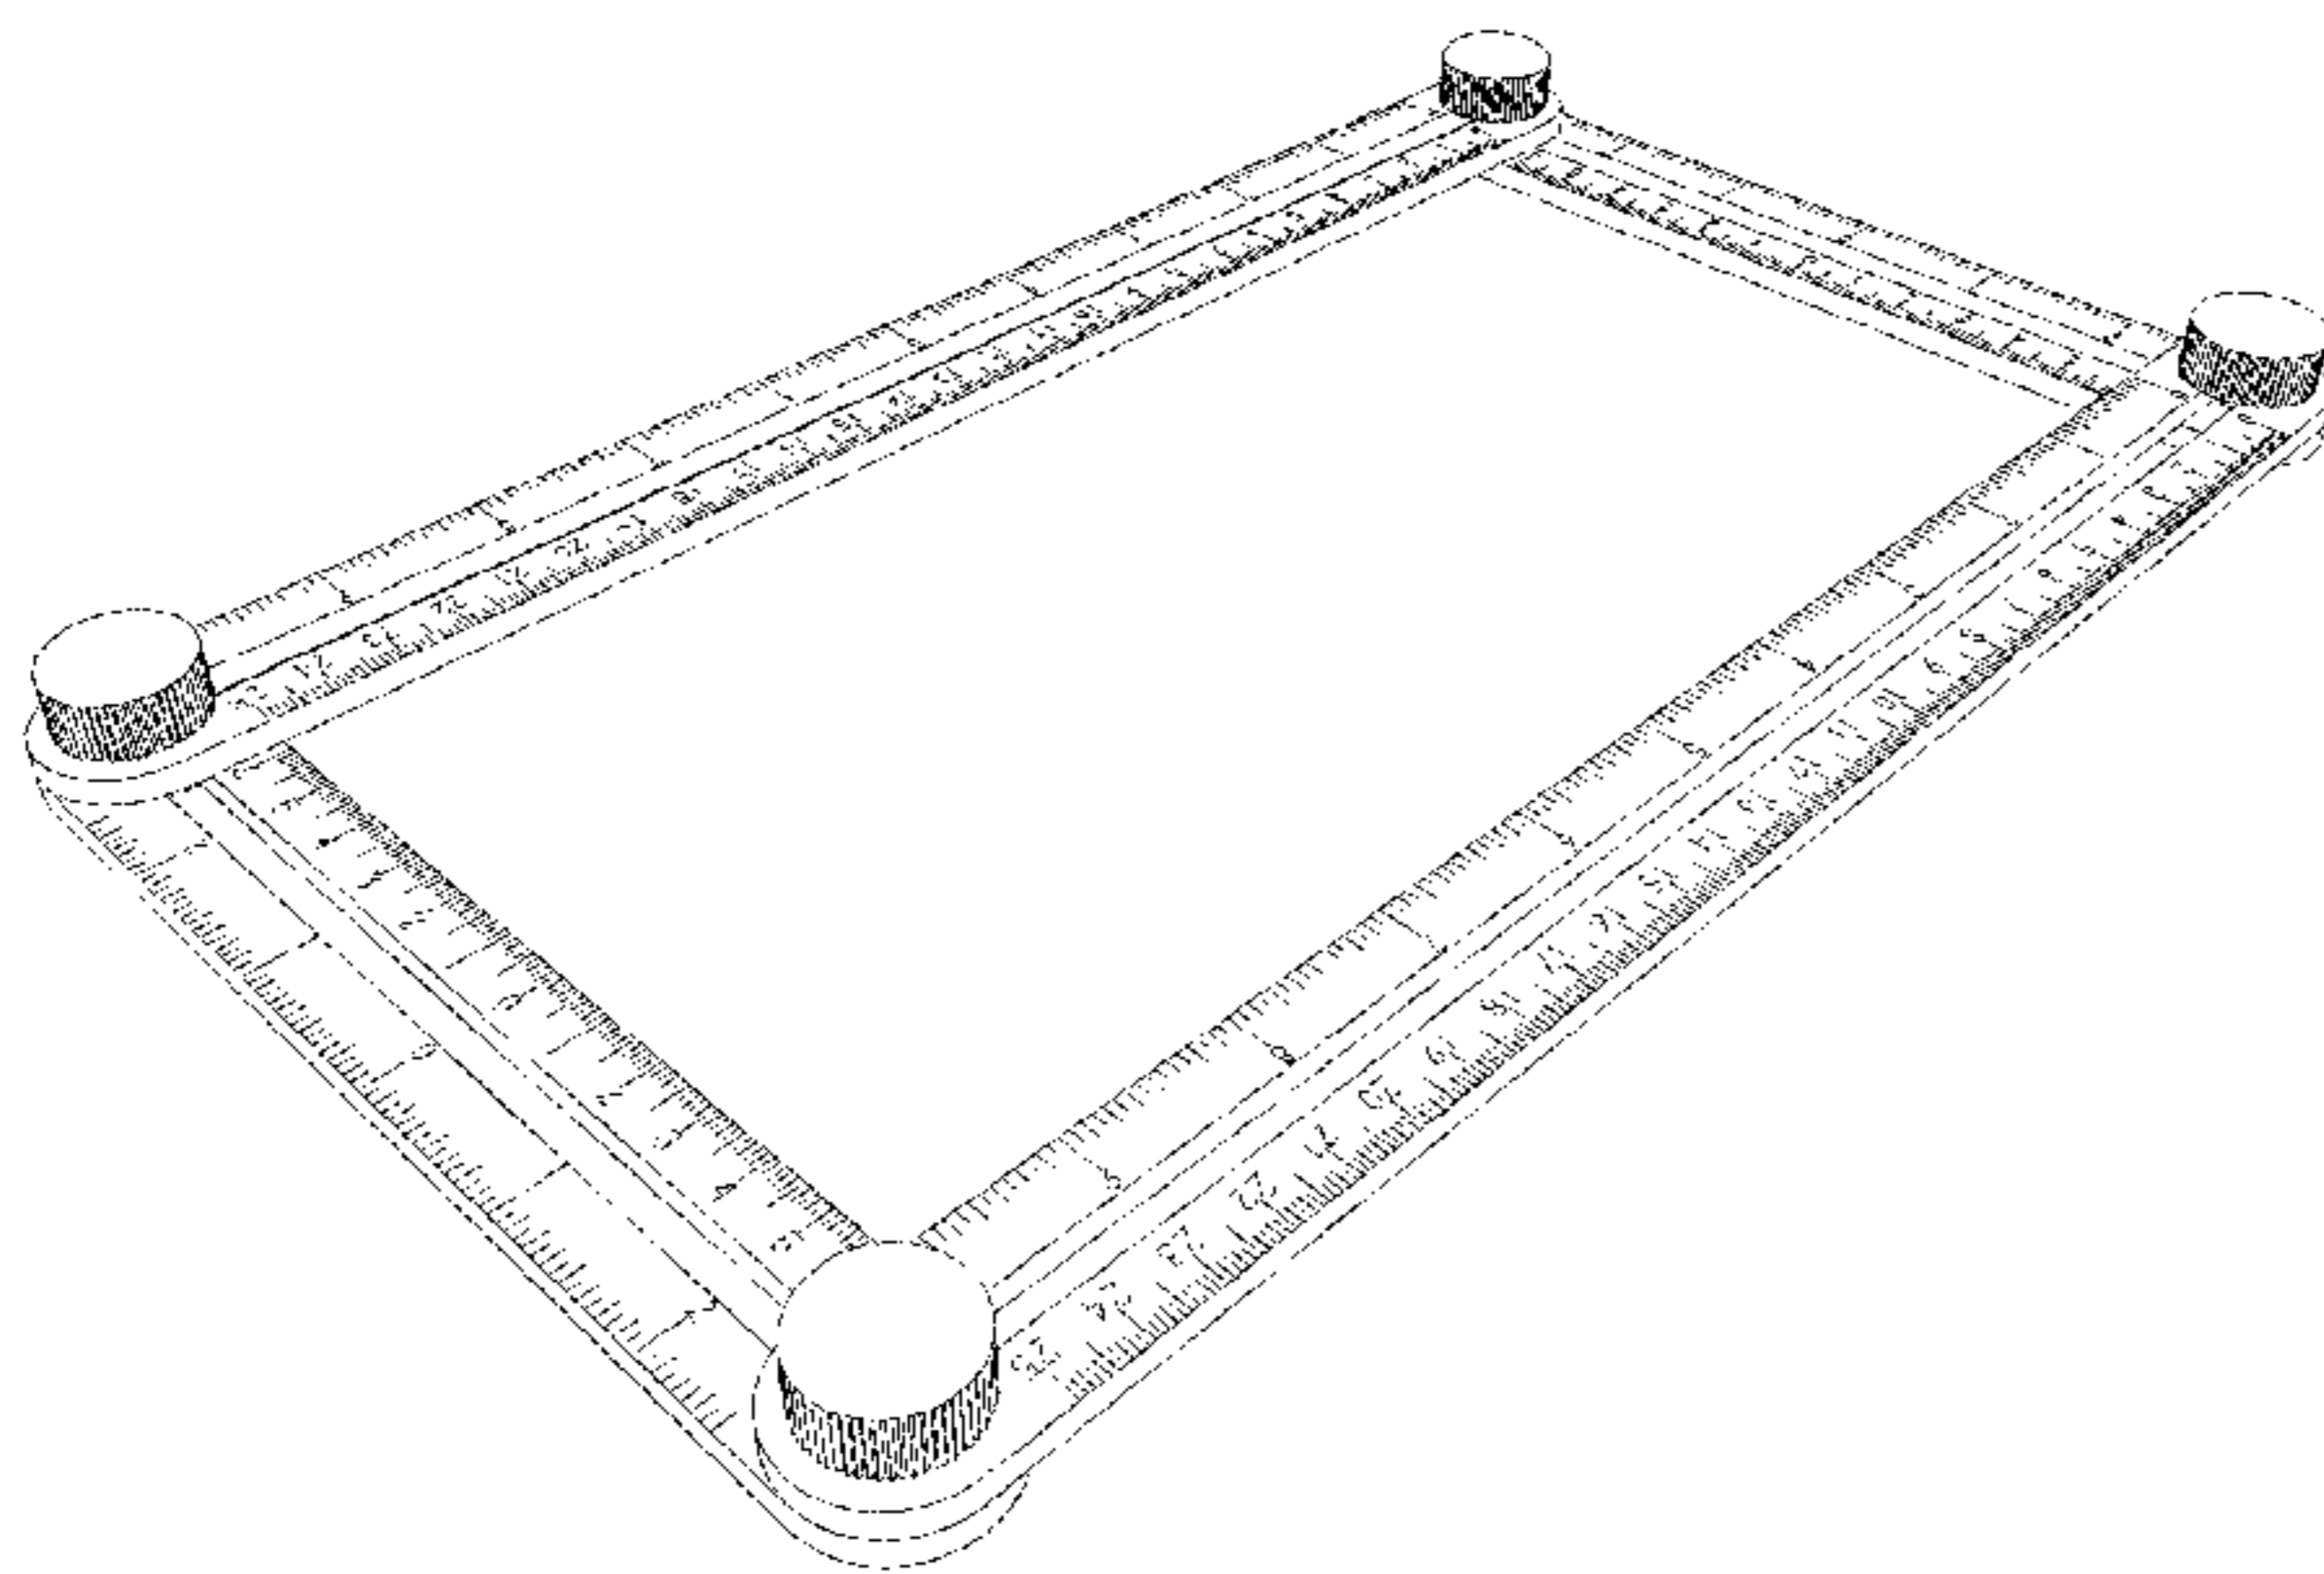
is a front elevational view of an angle template tool showing my new design;
